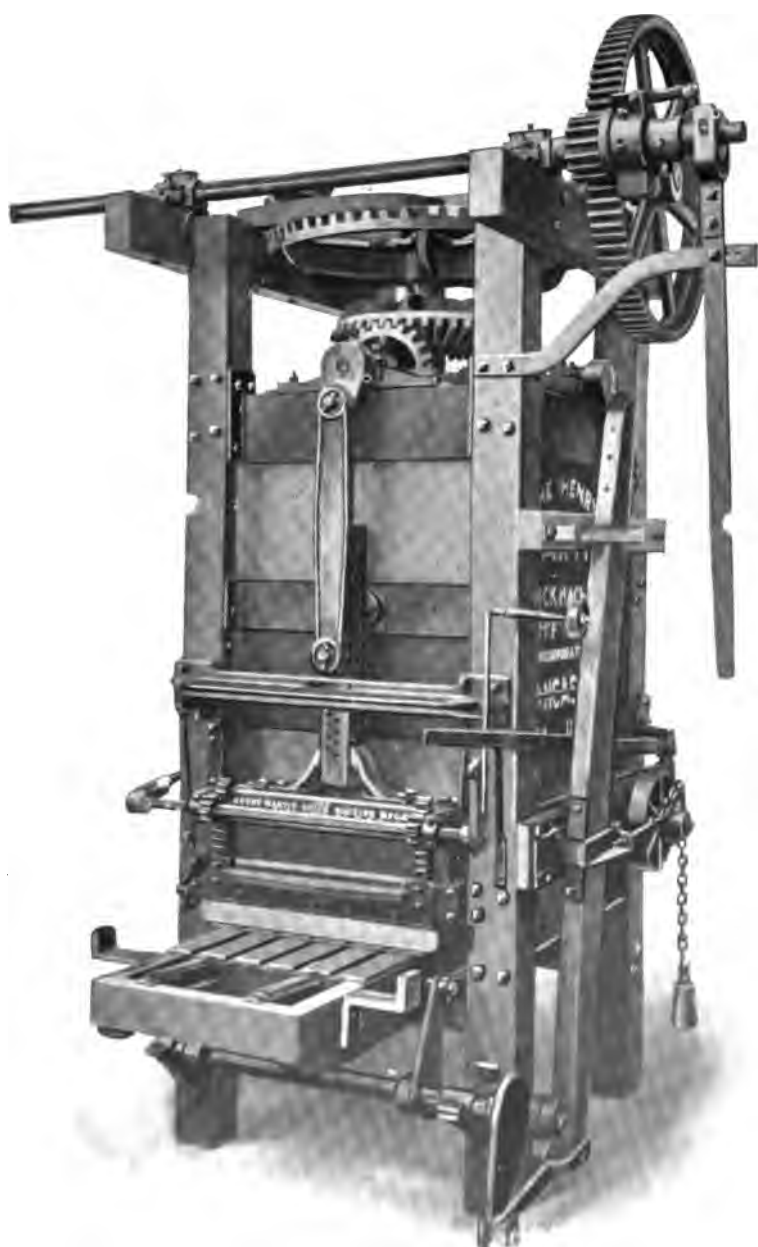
PLATE IX.—HENRY MARTIN "B" BRICK MACHINE.
